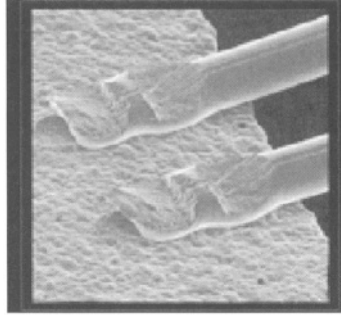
Another example of wedge bond with grooved wedge tool [Courtesy: Gaiser Tool]
